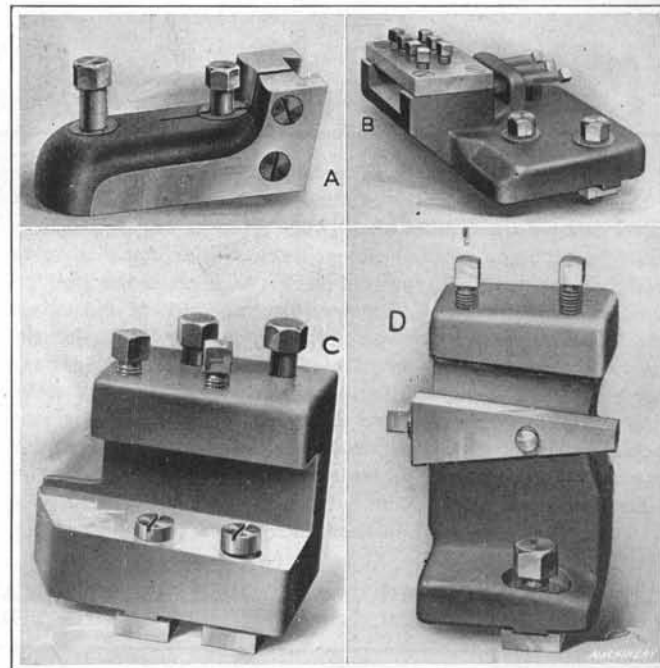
Forming and Cutting-off Tool-holders used on Gridley Single-spindle Automatic Turret Lathe
